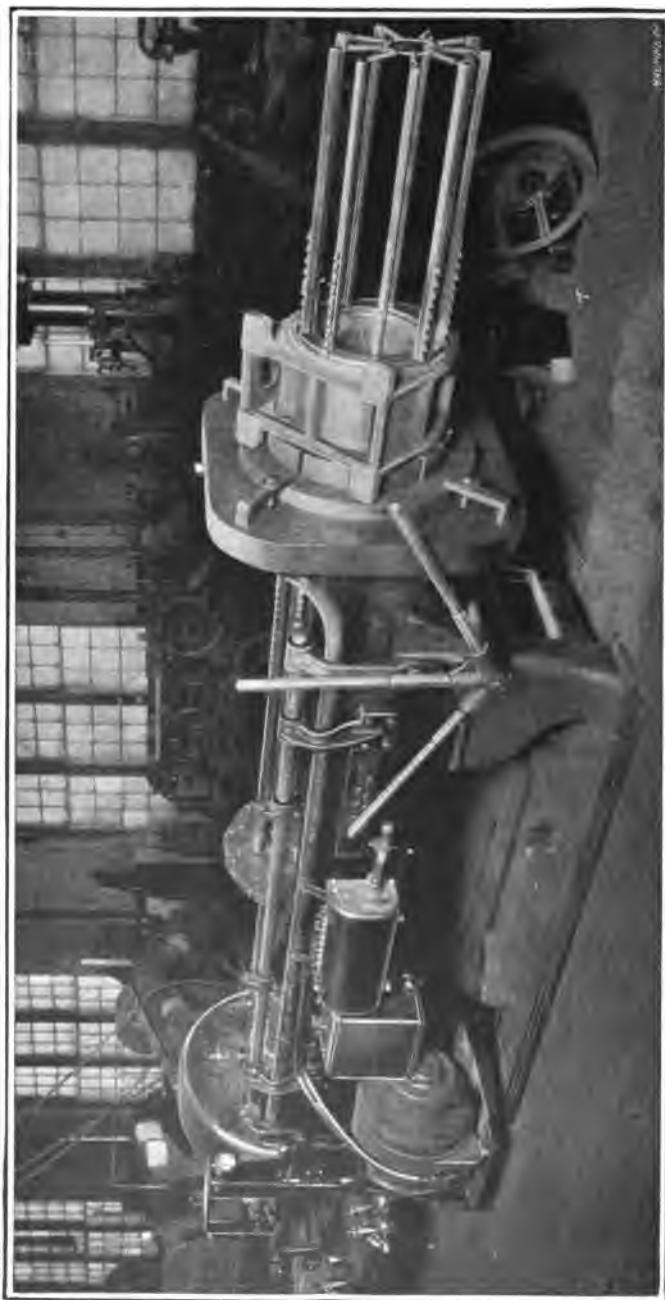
Broaching Machine equipped with Nine Broaches for simultaneously cutting Shallow Grooves in a Casting
